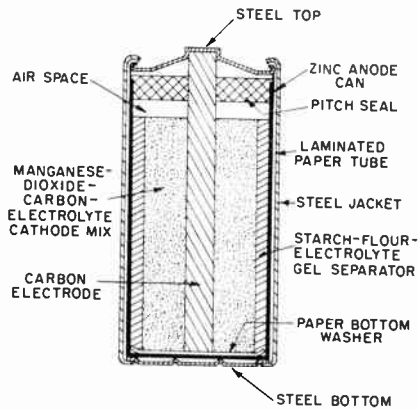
Cross section of a typical cylindrical flashlight dry cell.
